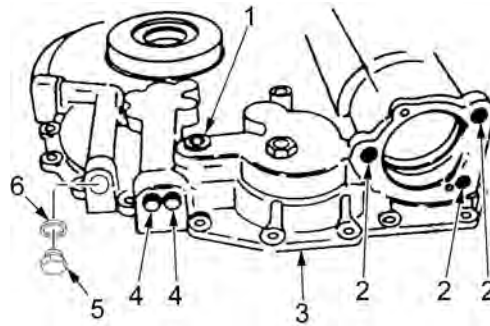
Pipe Plugs, Inserts, and O-Rings, Left Cover Assembly Removal, View 1.
